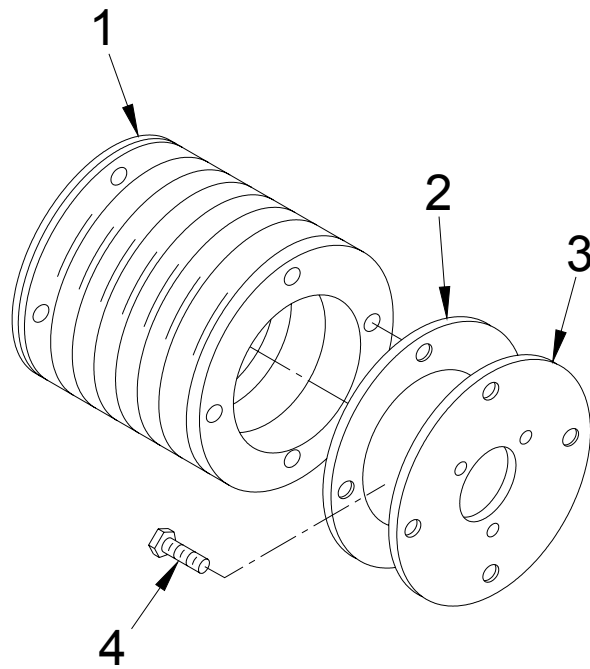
EXHAUST SYSTEM ASSEMBLY/BELLOWS ASSEMBLY
